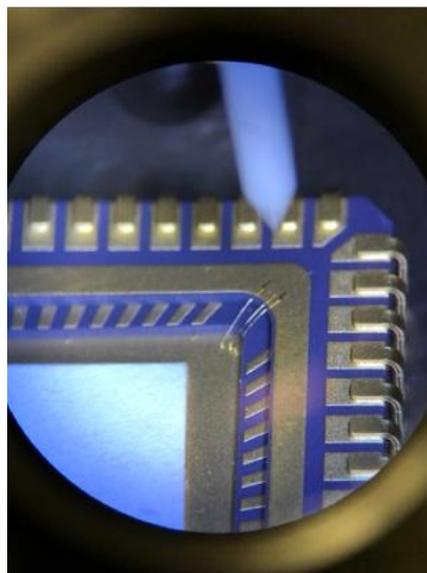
Wire bonds formed between the bottom of the sample cavity and the annular gold rail/bus of the chip carrier package. Three bonds were formed for redundancy, and the bonds were created before the sample was mounted in the chip carrier package.
